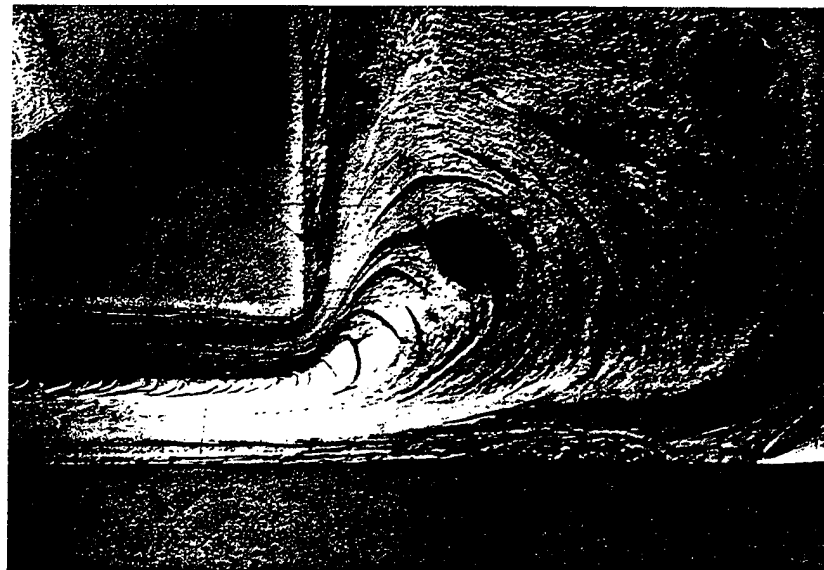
Longitudinal section of injection corner of unburned tube showing many smaller cracks. Magnification: 9.6X.
